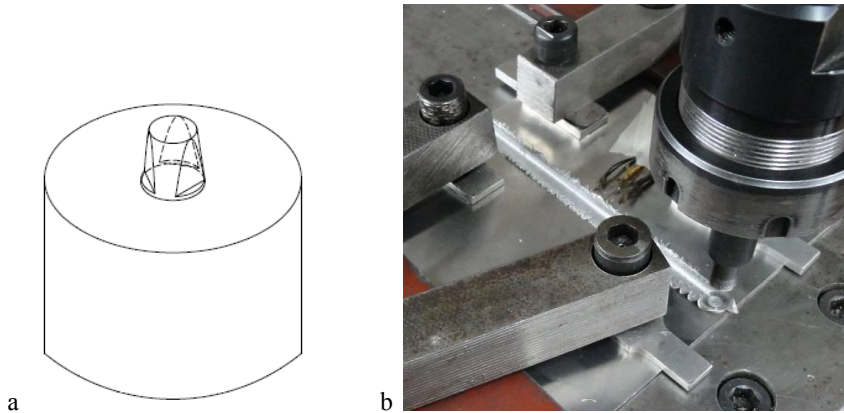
(a) Scheme of FSW tools; (b) FSW experimental set up.
